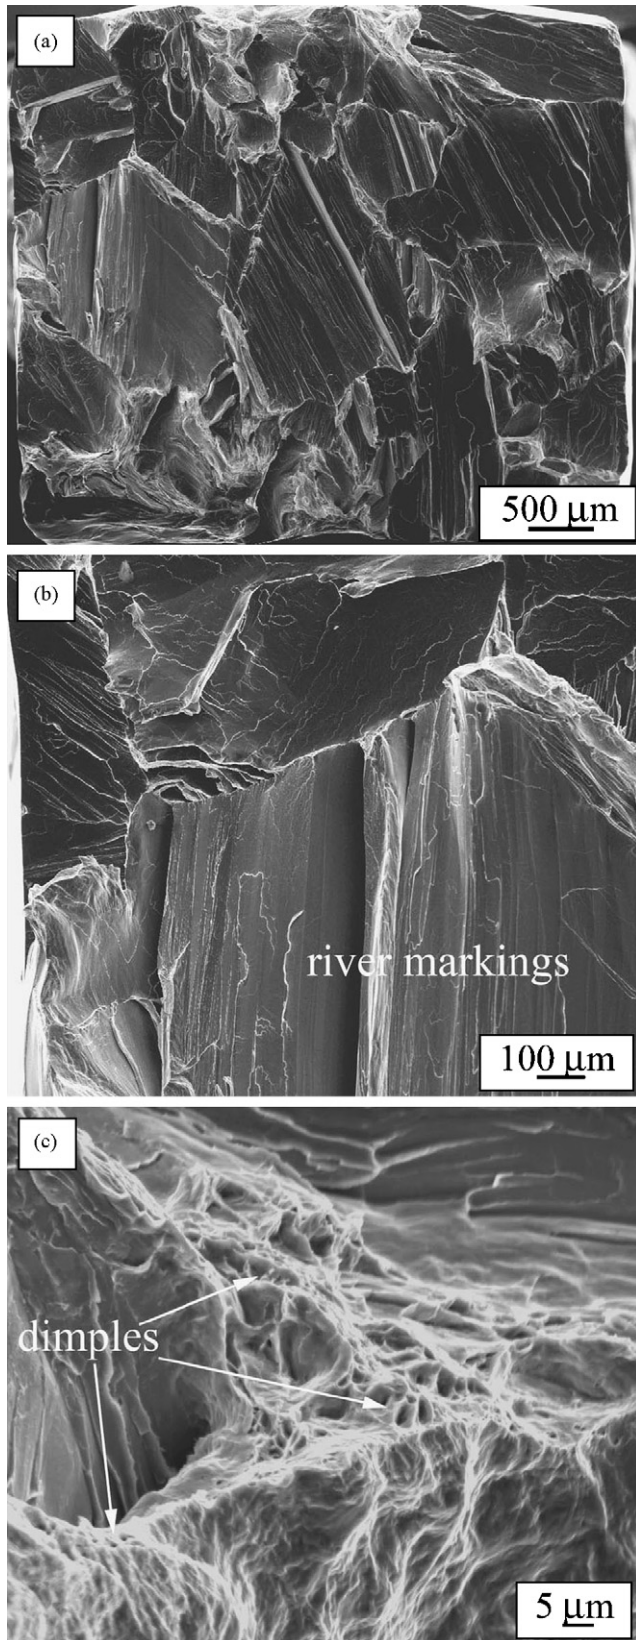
Brittle fractograph of coarse-grained specimens: (a) macroscopic fracture surface; (b) river markings; (c) dimples and tearing morphology near grain boundary.
